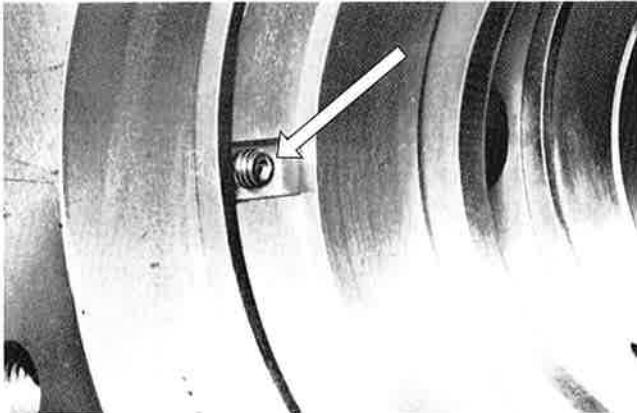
Loosing grab screw of balance piston sleeve (125~250UD type)
